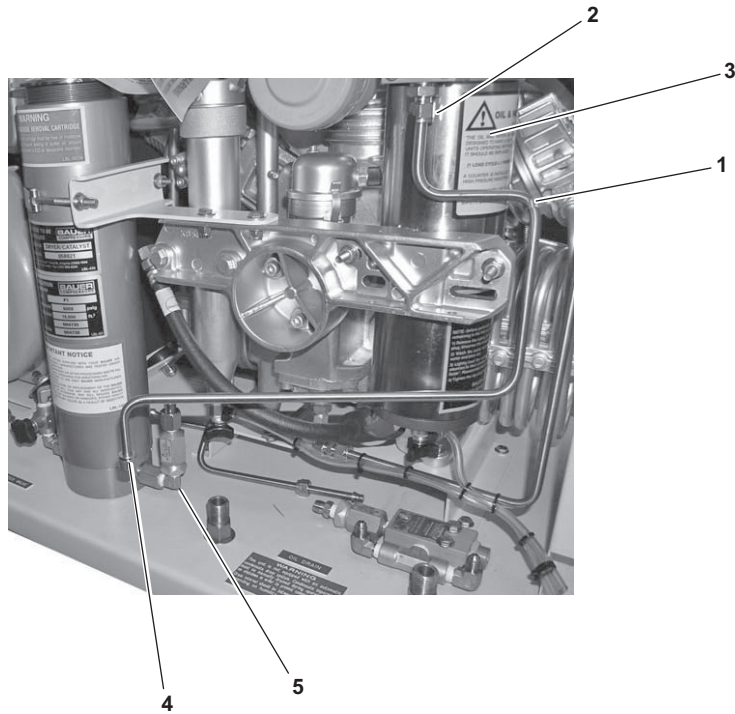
Line Connecting Final Separator and P1 Check Valve
